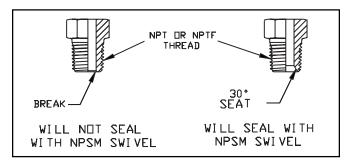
Illustration showing the required 30° seat on NPT/NPTF threads for NPSM swivel to seal
